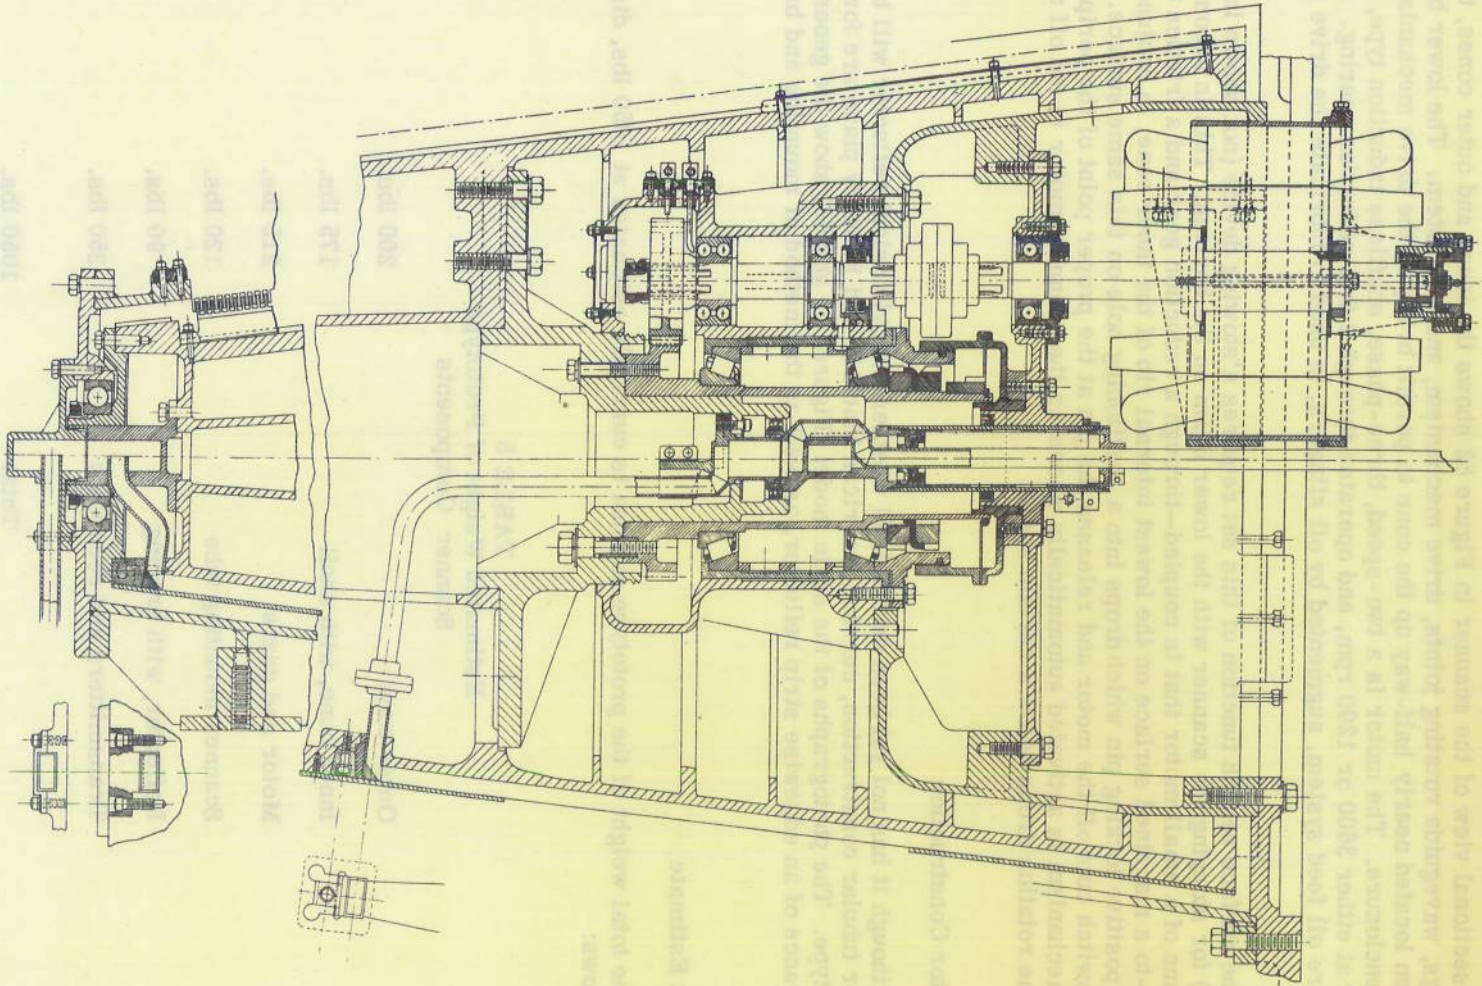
Lateral section of AMF scanner showing motor drive and waveguide rotating joints
